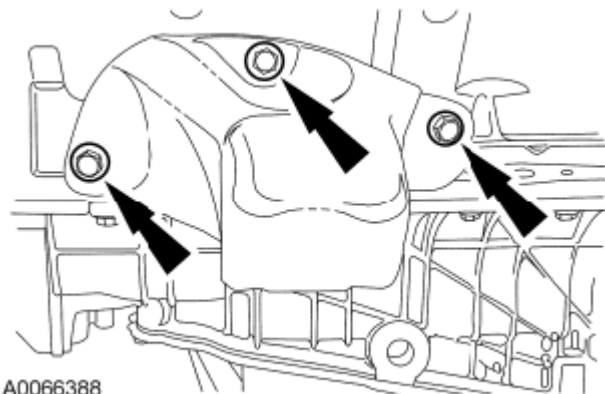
Locating RH And LH Insulator Bolts And Brackets
